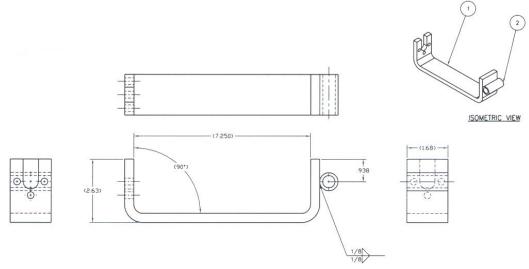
723 Series ERC Trunion Mounting Bracket (dimensions in inches)
